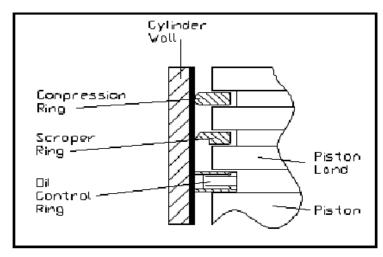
Assembly of lubricating Piston Ring and Cylinder Wall [21]
